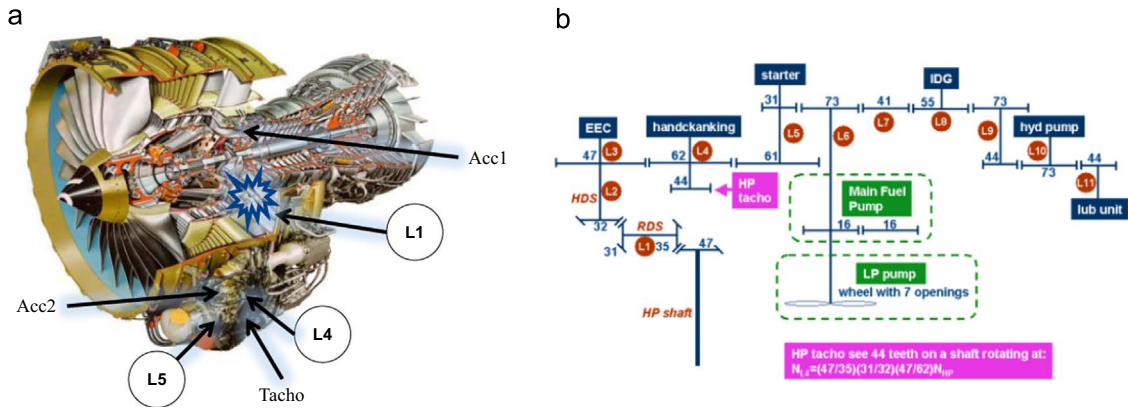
(a) Sensor locations and (b) gearbox kinematics.
